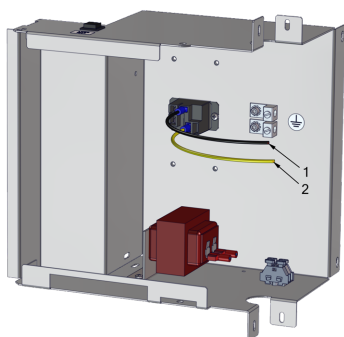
Electrical box with boiler pump relay - black and yellow wires - EX 400, EX 500
